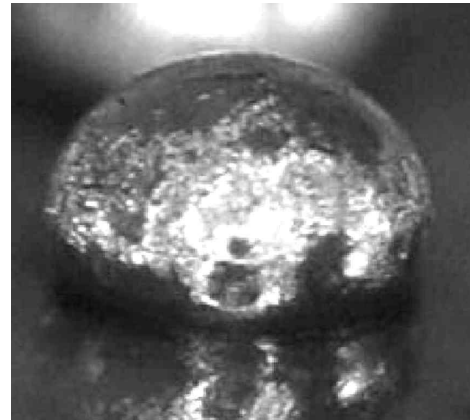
Yellowing discoloration of Pb-free solder ball caused by solder surface oxidation²⁰⁾
